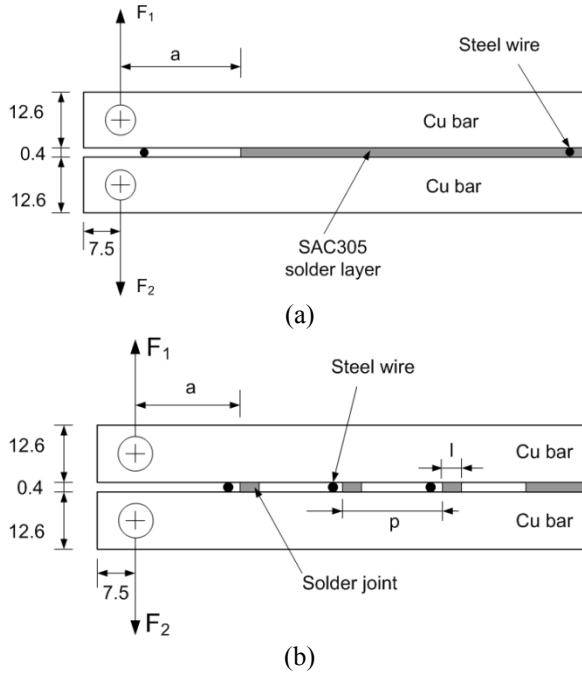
Schematic of a) the continuous joint DCB specimen and b) discrete solder joint specimen ($l=2$ mm and 5 mm). The width of the specimen was 12.6 mm and overall length was 160 mm. All dimensions in mm.
